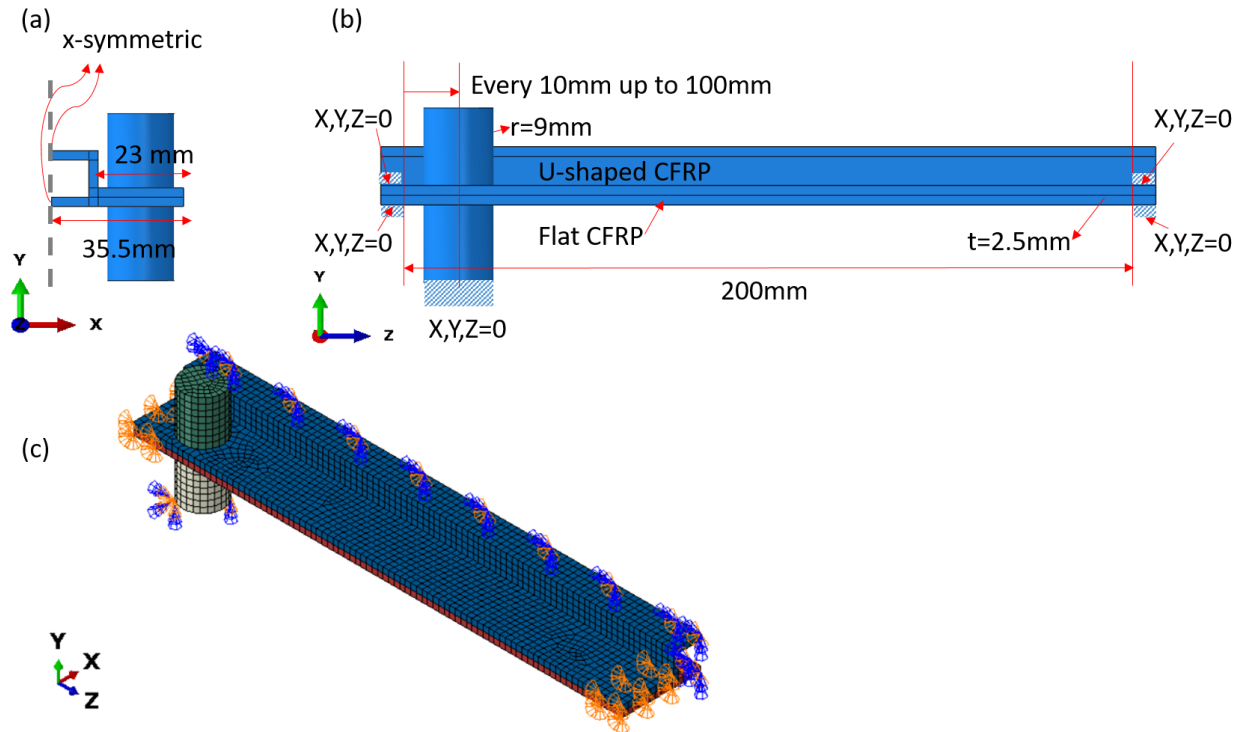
Geometry and boundary conditions in the finite element model: (a) Lateral view of the U-shaped and flat parts in contact with the upper and bottom horns, (b) Front view of the parts to be joined where the first spot is set-up for welding and (c) Isometric view of the assembly of the parts with elements
